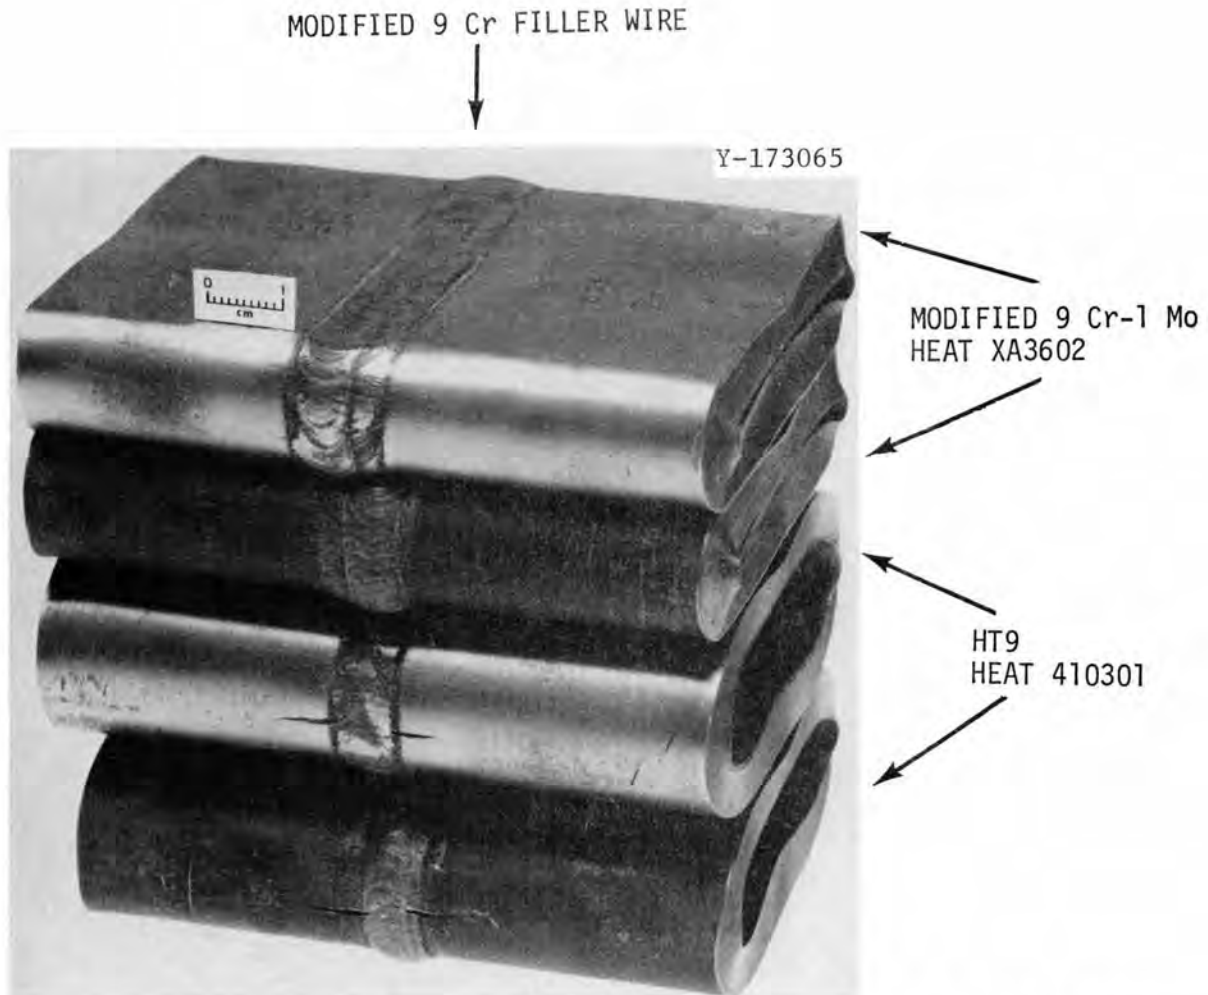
Response to the flattening test conducted on welded tubes of modified 9 Cr-1 Mo and HT9. Both materials were welded with modified 9 Cr-1 Mo filler wire and postweld heat-treated at 732°C for 1 h.
